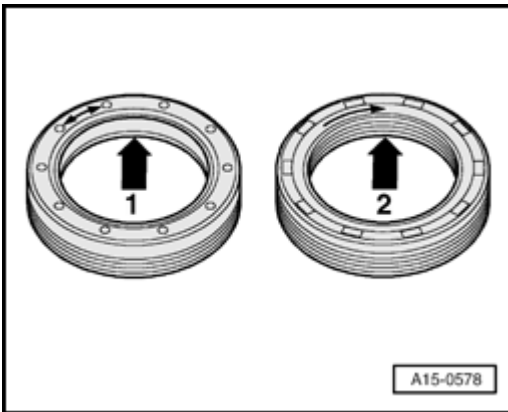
Identifying A PTFE Seal (Teflon) & Inner Coil Spring Type Seal
